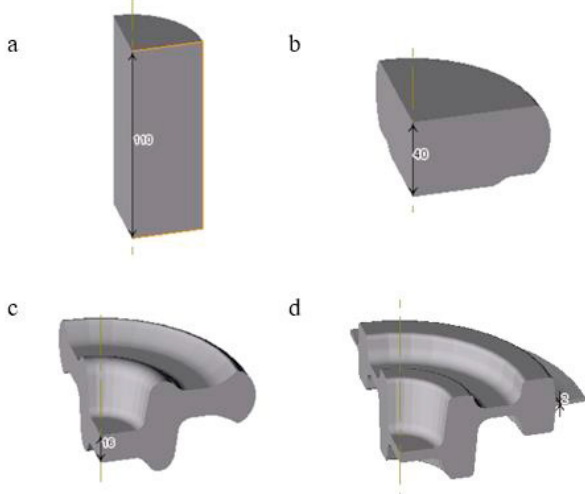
Three stage process of flange disk forging: the billet (a), upsetting (b), preforming (c) and finish blow (d).
